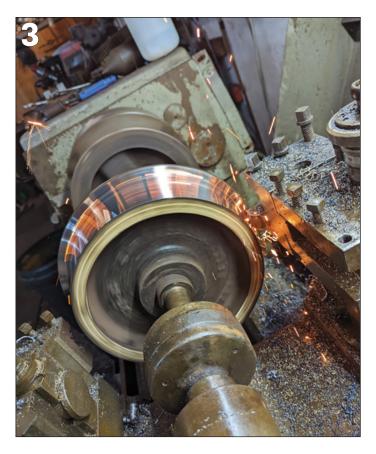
shows what happens when you are machining a welded wheel and start into the transition between the base cast steel and the weld - the heat of the weld hardens the cast steel and in the photo the carbide tip is gradually being smashed up as it tries to deal with hard spots on the wheel interrupting a normal cut. The sparks you see flying off are from the very hard bits.
